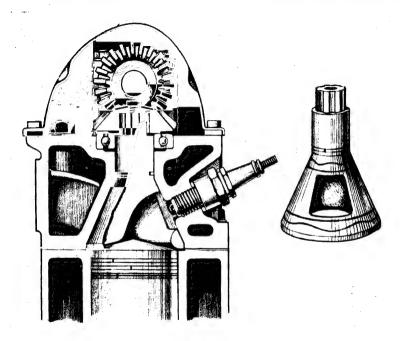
First Aspin multi-cylinder liquid-cooled engine.
